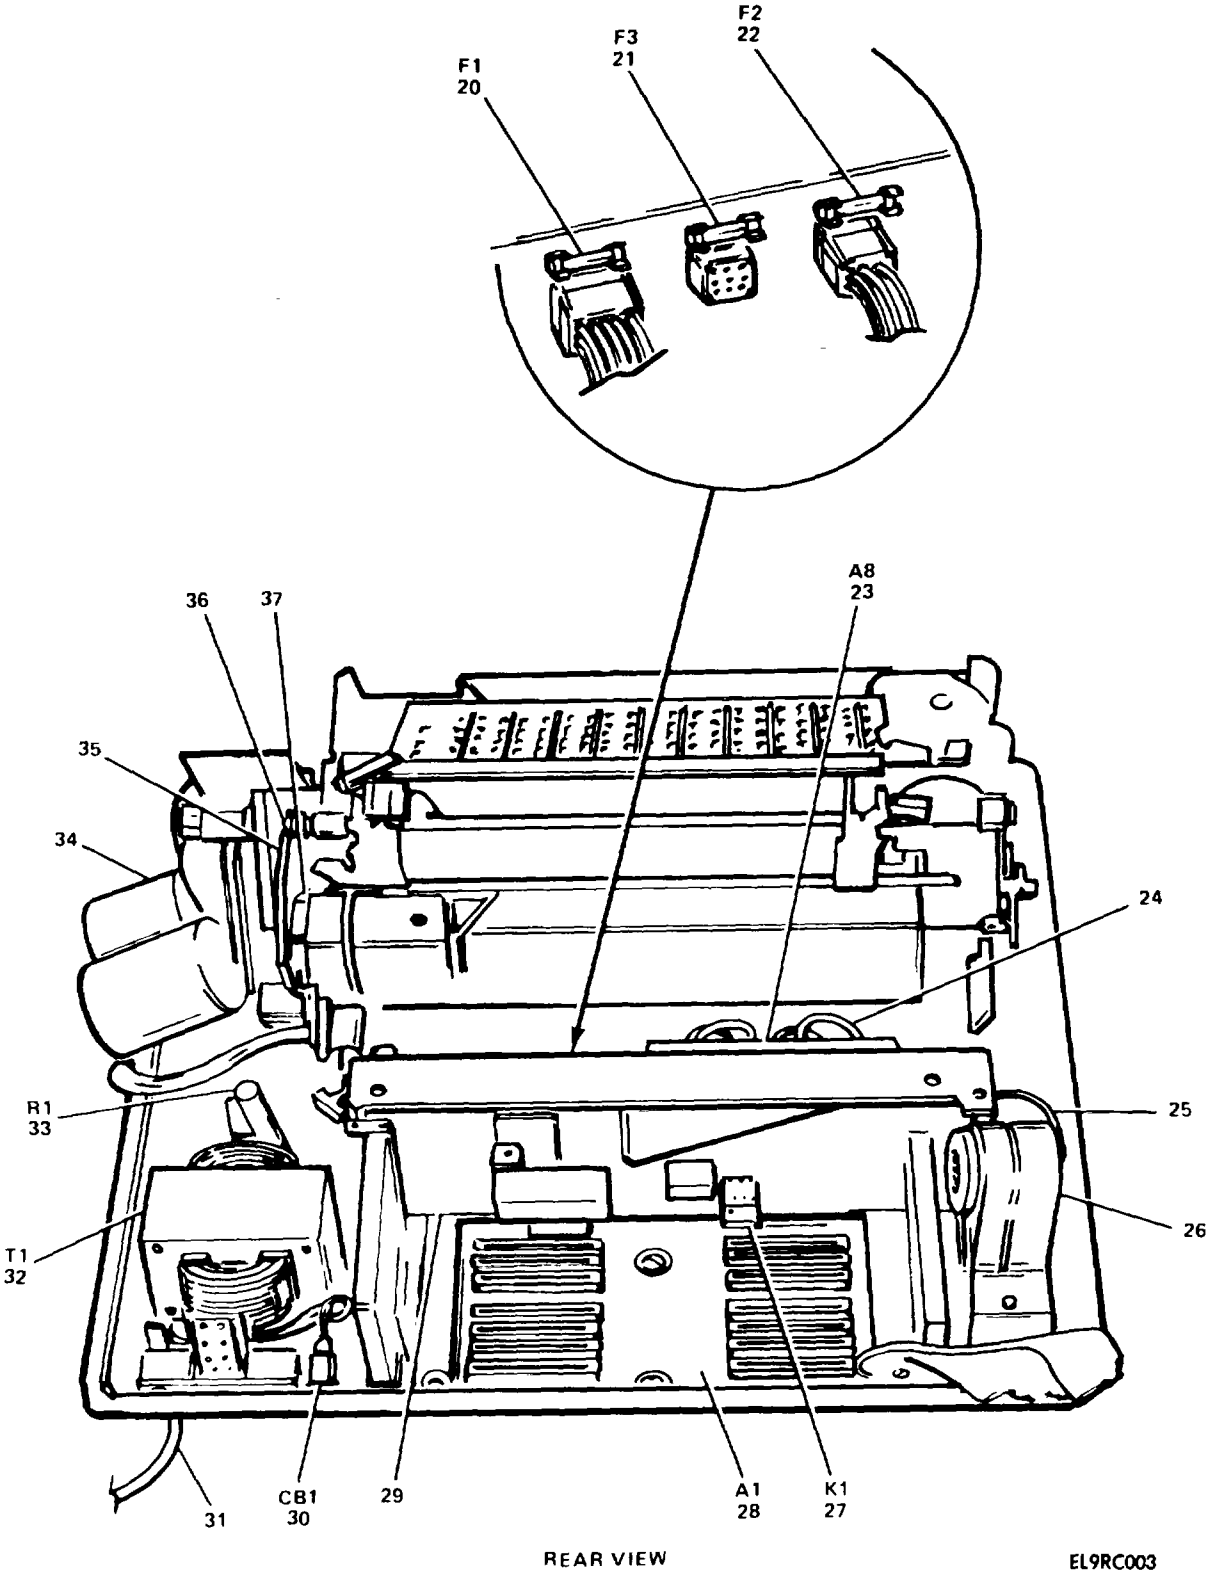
LP600 Line Printer (Sheet 3 of 3)
